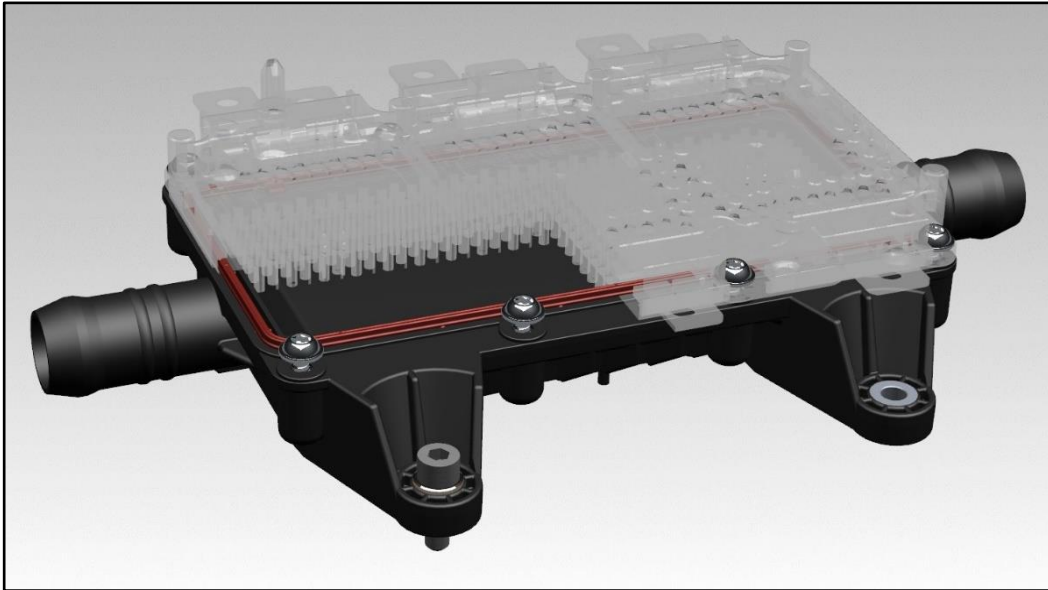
Thermoplastic reference cooler housing with mounted IGBT Modul for HybridPack Drive
